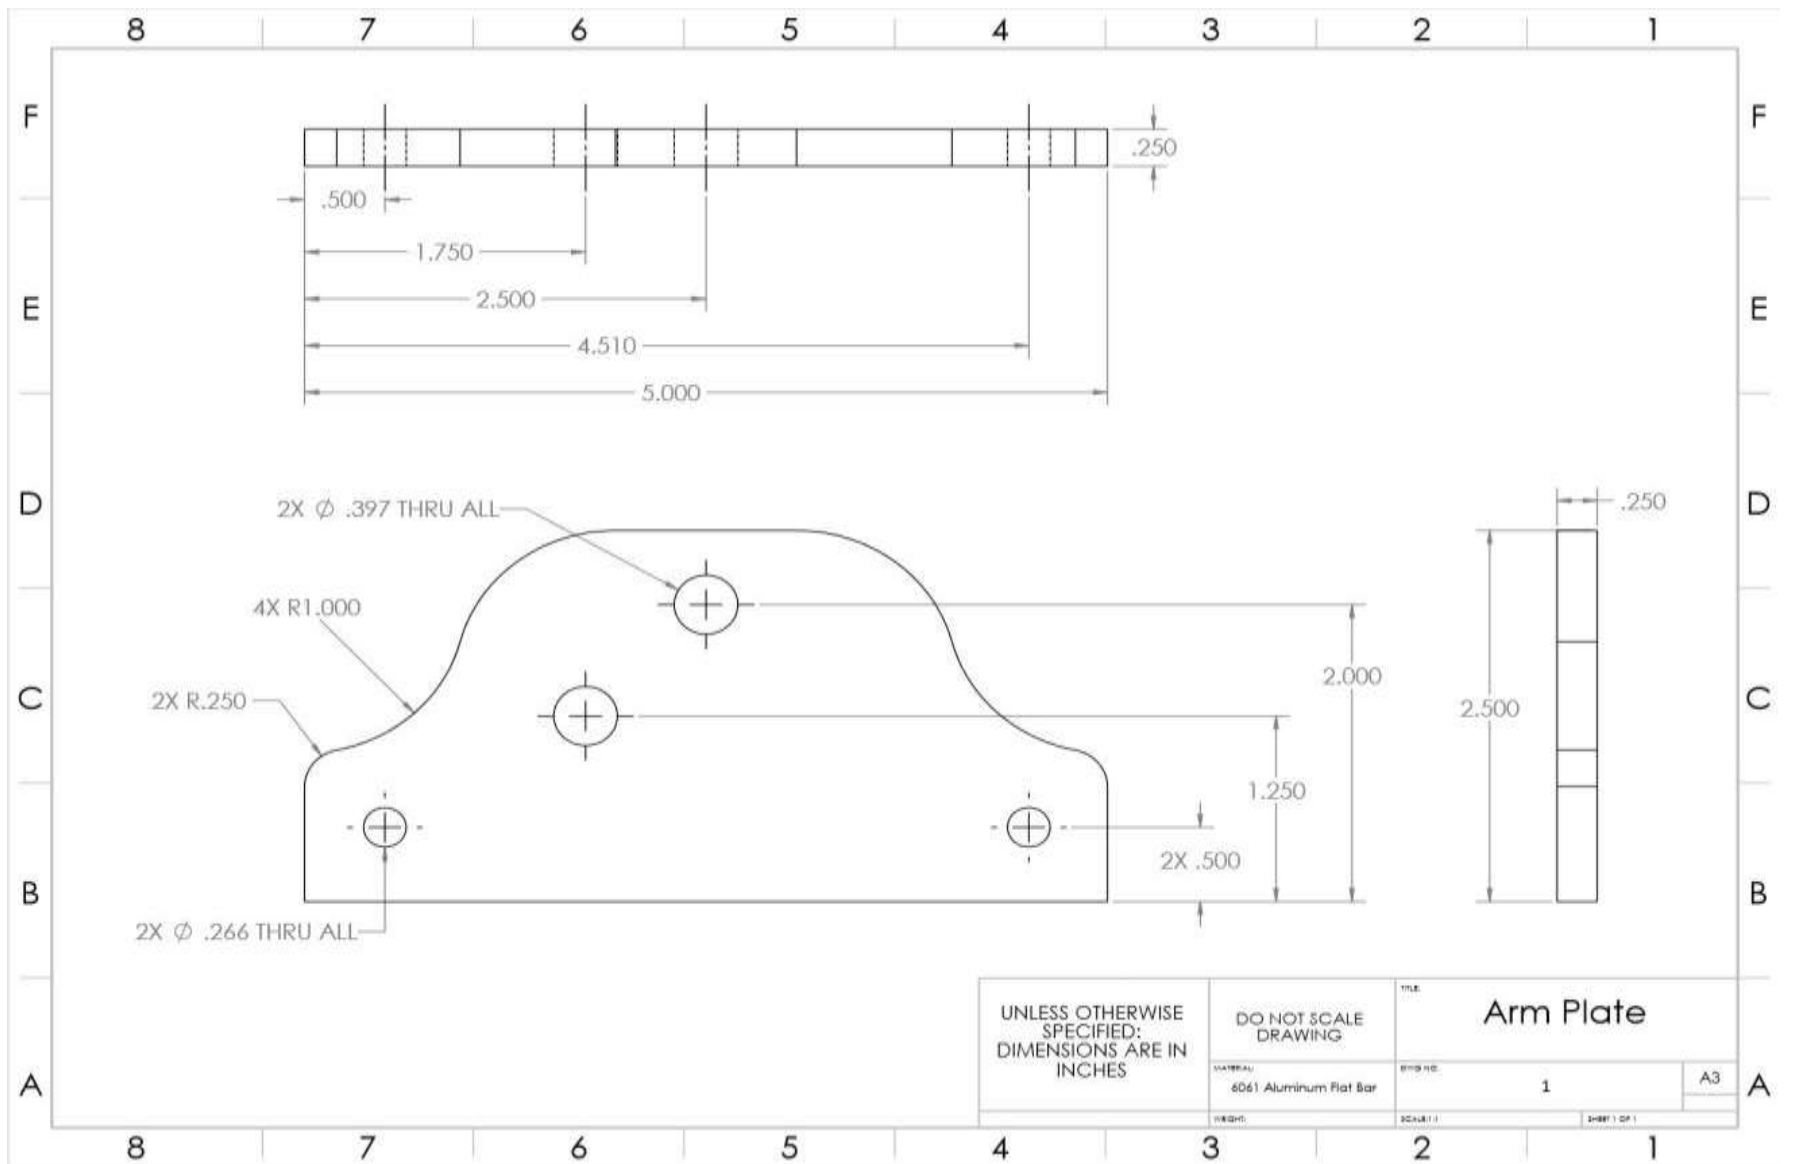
1. Mechanical Drawing of Arm Plate.
